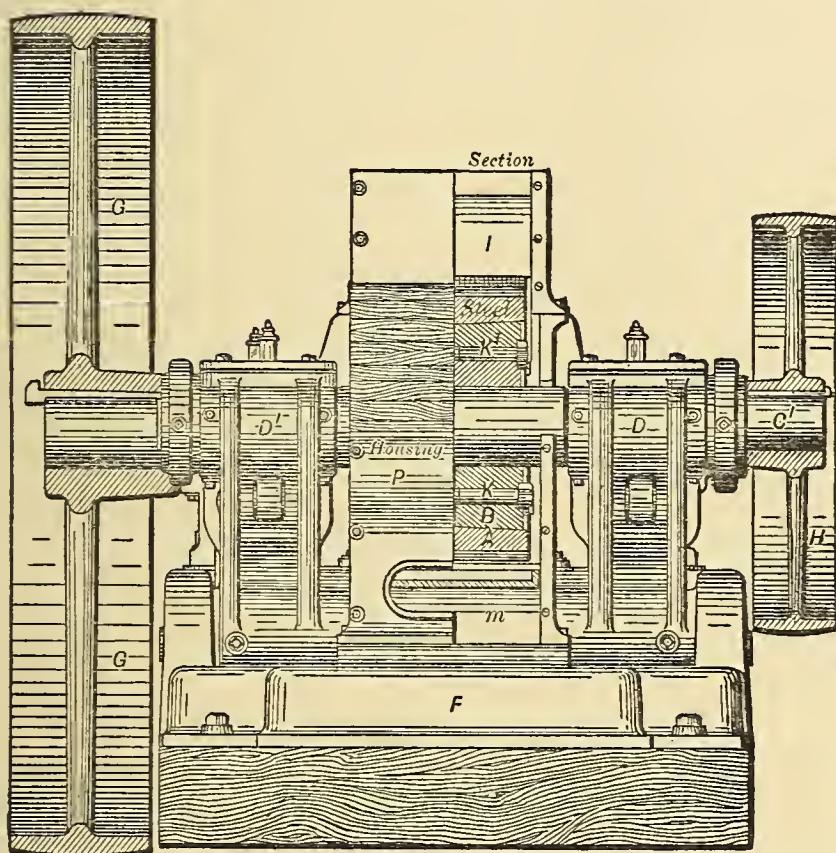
END VIEW OF KROM'S IMPROVED STEEL CRUSHING ROLLS.
